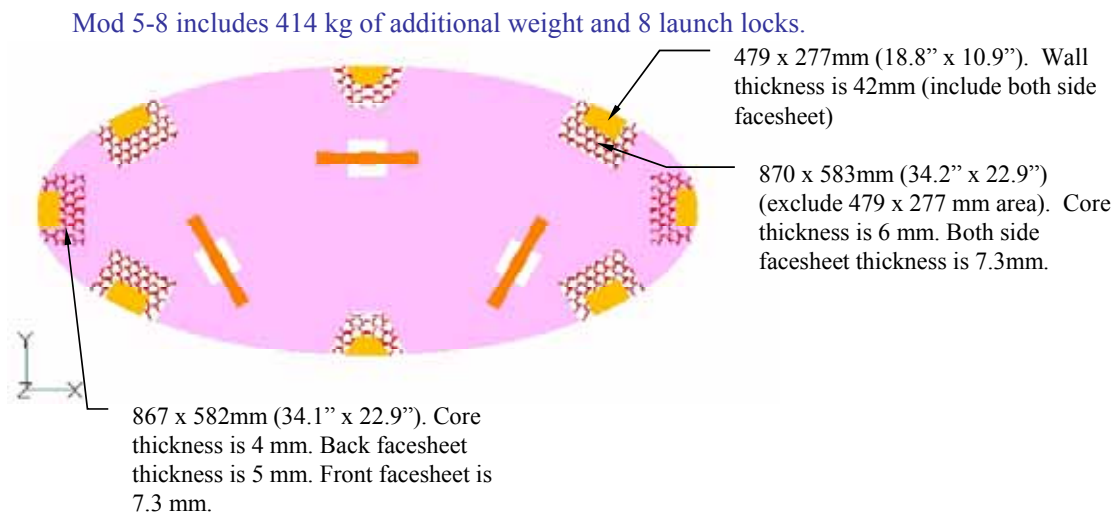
Modified PM Assembly with 8 Launch Locks
